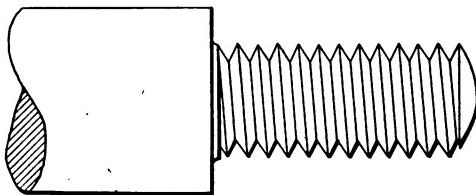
The method of producing a thread close to the shoulder as shown is described in the text
